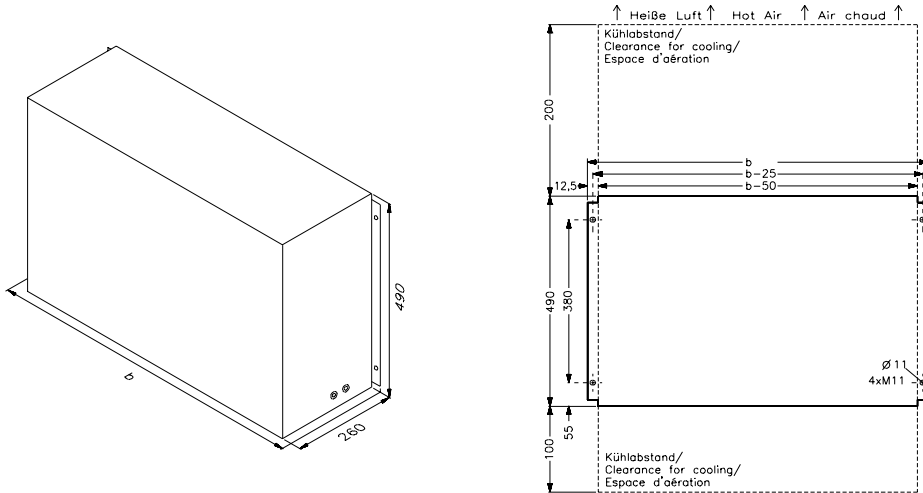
Outline drawing and mounting OPTION 100BR012
